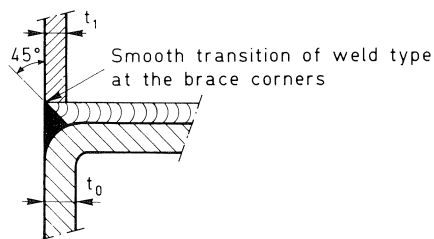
Weld detail for joints with $\beta = 1.0$.
